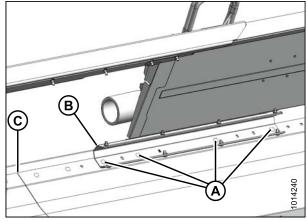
Left Stripper – Narrow Opening (Auger Not Shown for Clarity)
